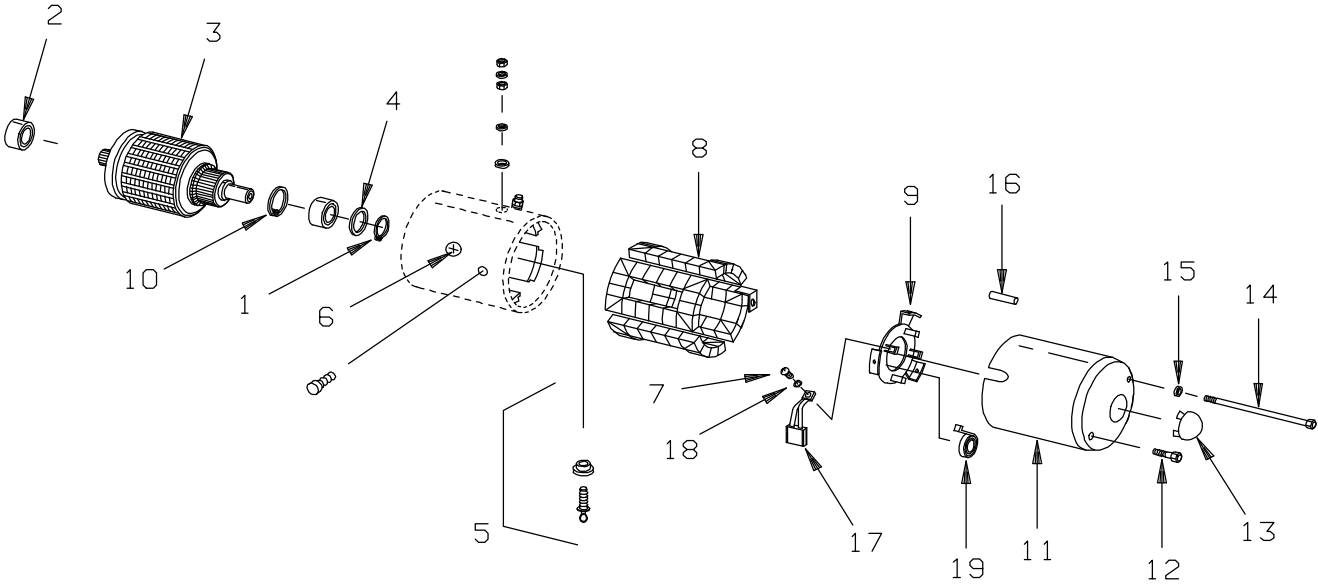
SC-20 BOSH PUMP AND MOTOR ASSEMBLY (12 VOLT, 21872-00)
